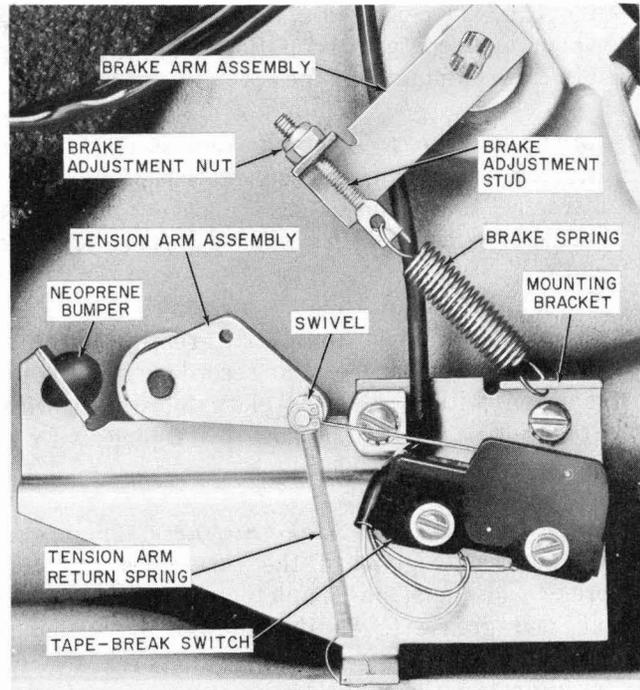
Rear Components of Take-Up Brake and Tension Arm Assembly
